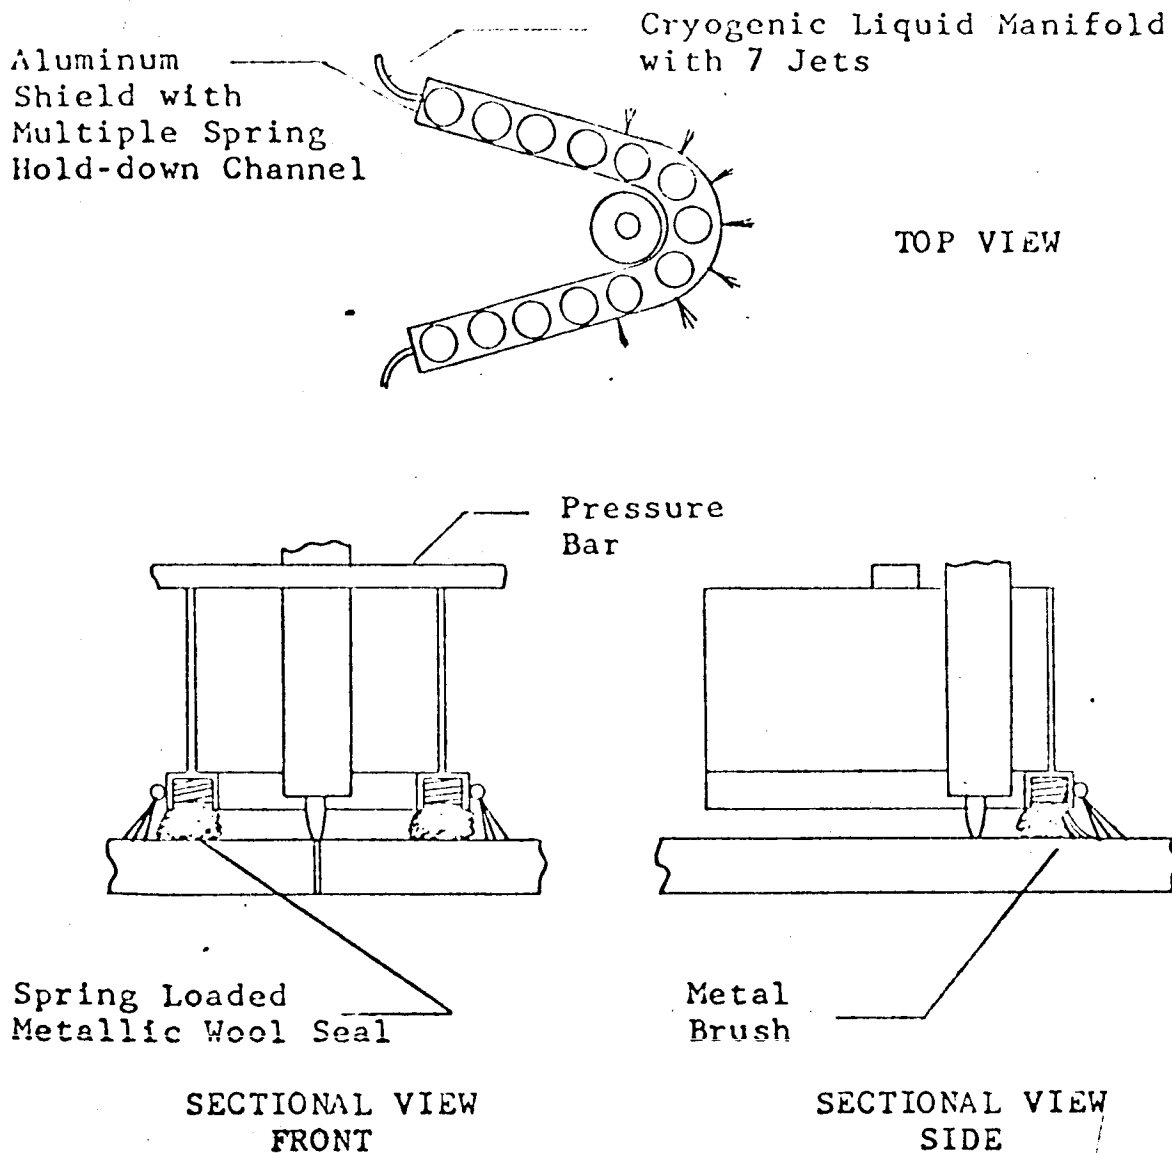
Jet System No. 12 for Front Side Chilling using a Cryogenic Liquid--Traveling Shield with Spring Loaded Metallic Wool and Wire Brush Seal - 7 Jet Manifold
